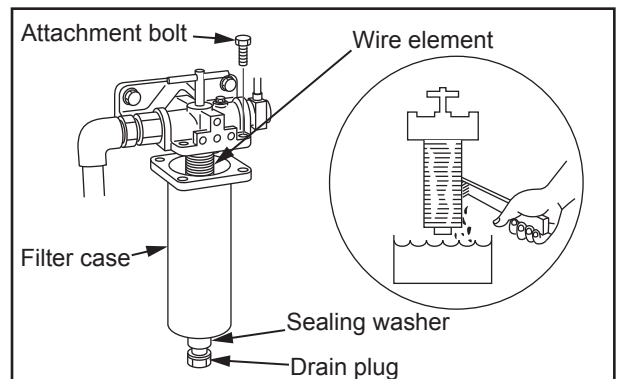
Inside of Fuel Filters (Wire-element Type) - Clean
